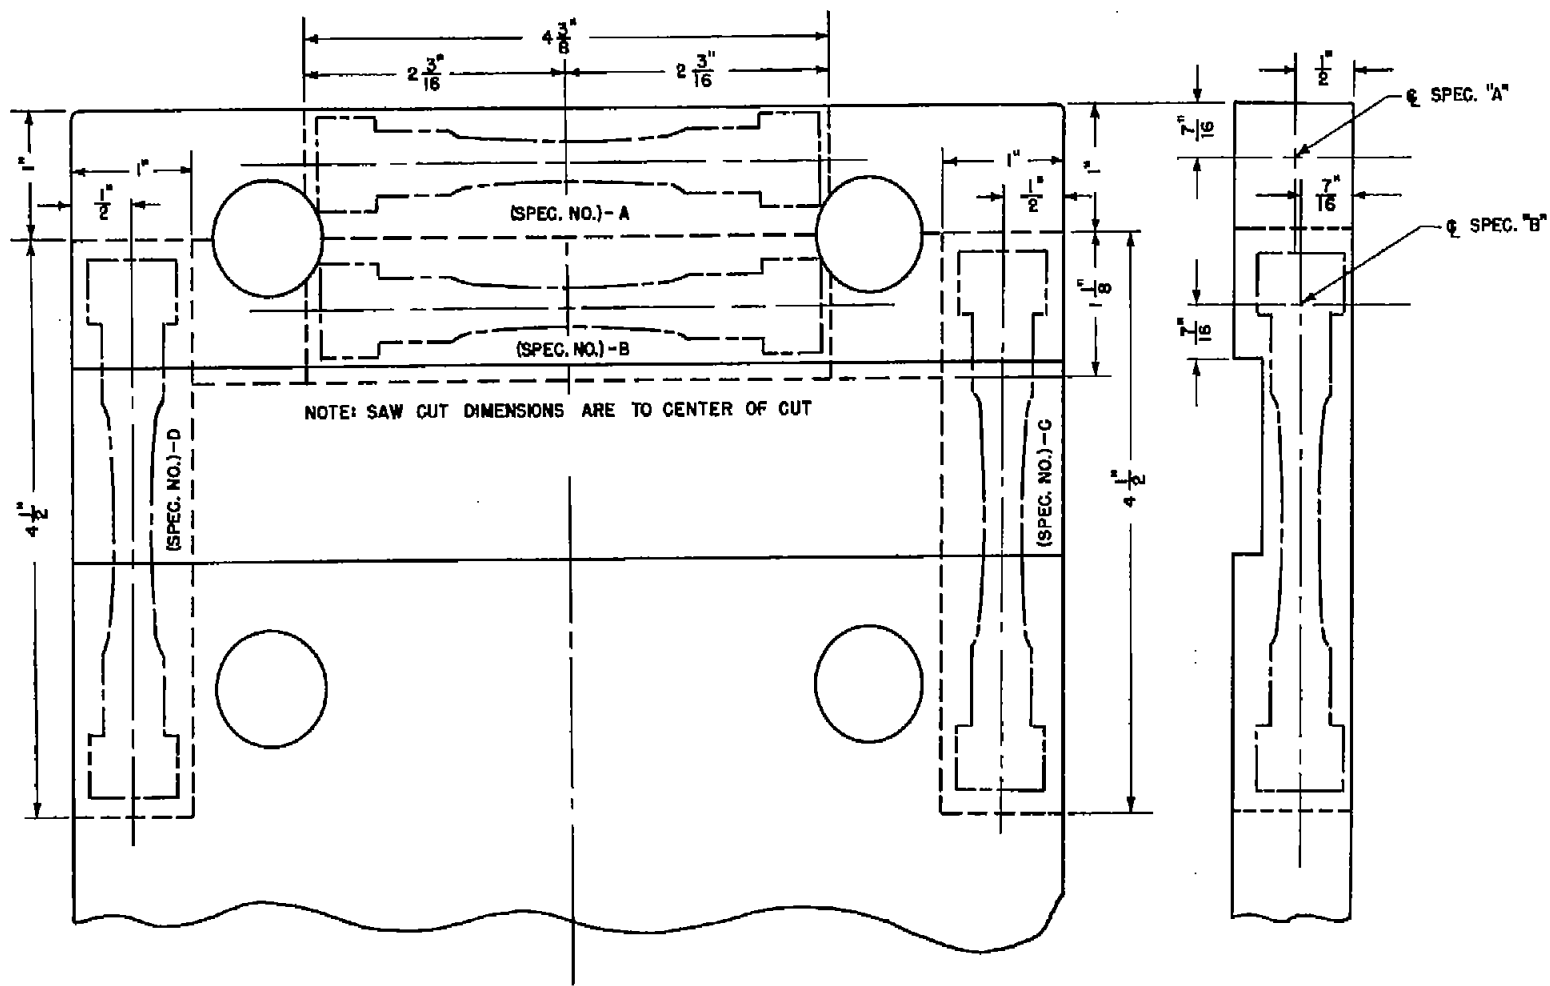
Location of direct-stress fatigue specimens from machined casting. (Specimen number followed by "-1" indicates it was machined from opposite butt end.)
